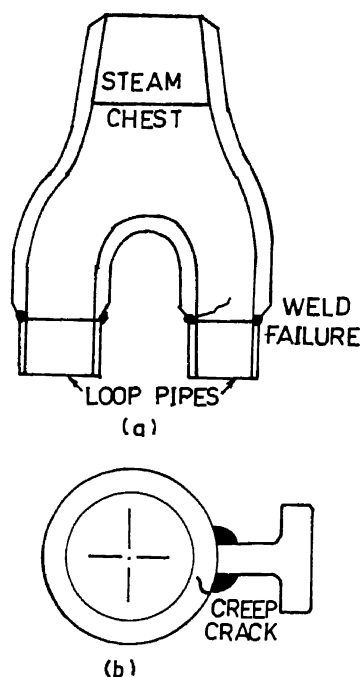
(a) IP steam chest and pipe joint. (b) superheater tube joint.
